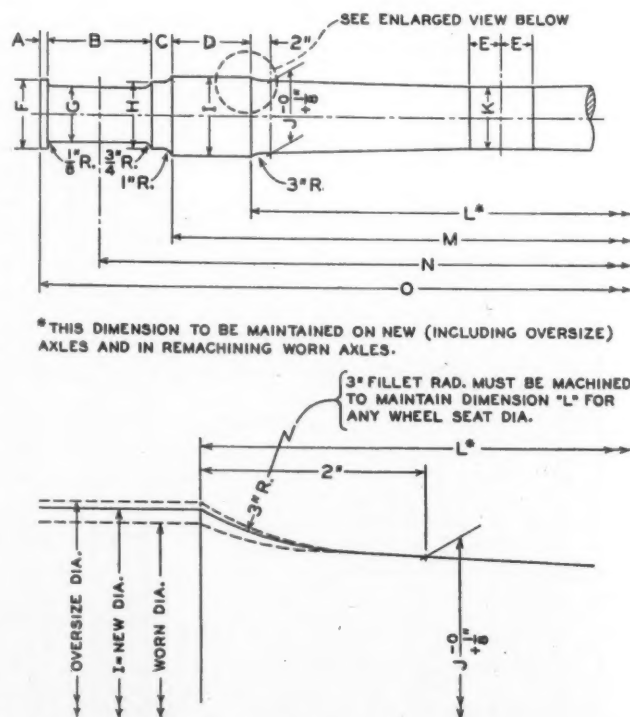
New A. A. R. axle dimensions—Enlarged view showing condition at fillet joining body of axle to inside edge of wheel seat
